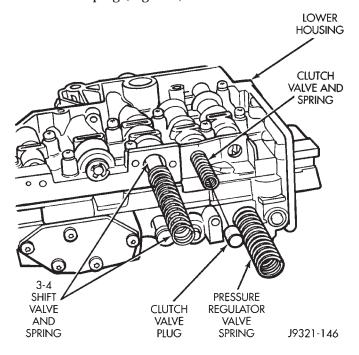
Clutch Valve And 3-4 Shift Valve Locations—46RH
